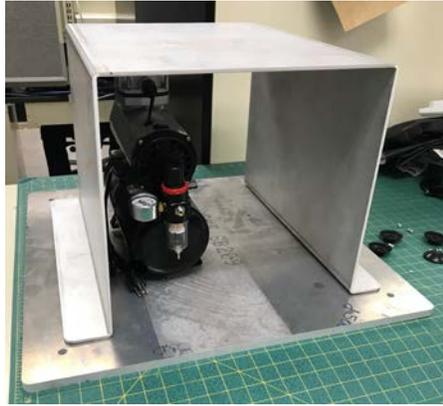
Compressor mounting plate with cover. Only one compressor is shown, another compressor was mounted next to the one shown.
